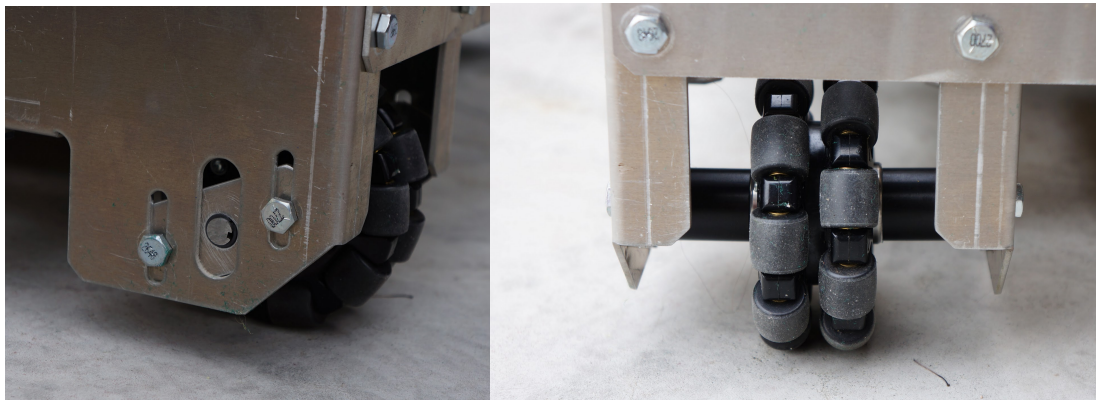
Adjustable Mounting Brackets for the Caster Wheels
